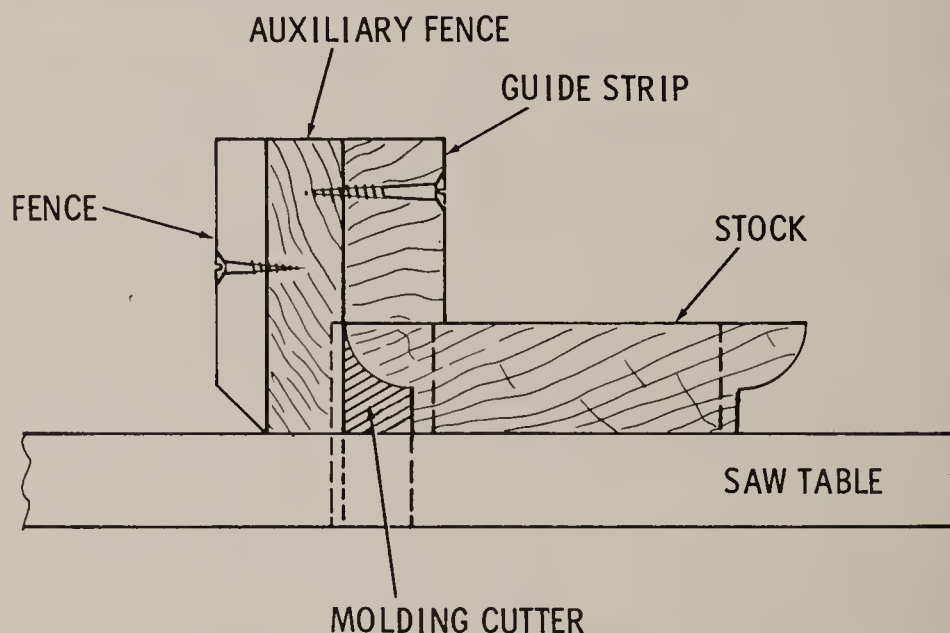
Method of cutting moldings on circular saw. Moldings are ripped to size along dotted line.
